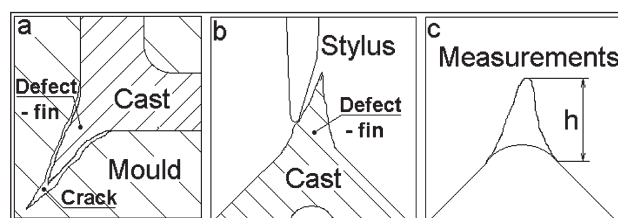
Schematic presentation of (a) die casting mould and casting, (b) measurement stylus drag across the castings surfaces, and (c) defect's-fin's height.
